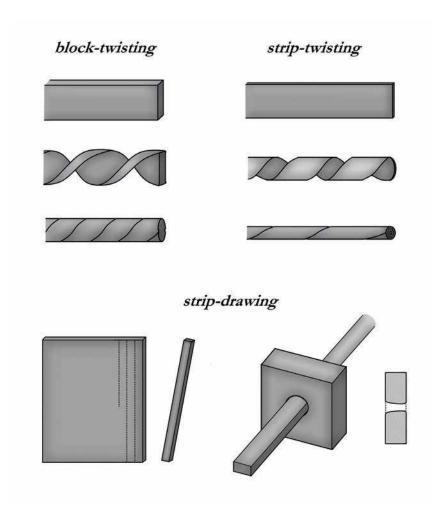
Three methods of making metal wire, in addition to wire-drawing: block-twisting, strip-twisting and strip-drawing. In block-twisting a rectangular rod is twisted into wire, while strip-twisting uses a thin strip of metal instead. Strip-drawing involves very thin sheet metal being cut into strips which are fed through a finishing die to give the wire the desired round cross-section (drawing M.A. Wijnhoven).
